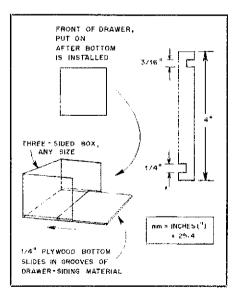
Construction of junkbox drawers using finger jointed and grooved drawer-slding material. Dimensions of the drawer should sult the builder.
